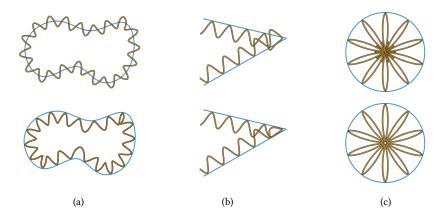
(a) Printing with the toolpath centered on the surface, or inside of the surface. (b) Adjusting a toolpath to keep it inside a surface on a sharp angle. (c) Adjusting a toolpath to minimize overlap and over extrusion.
